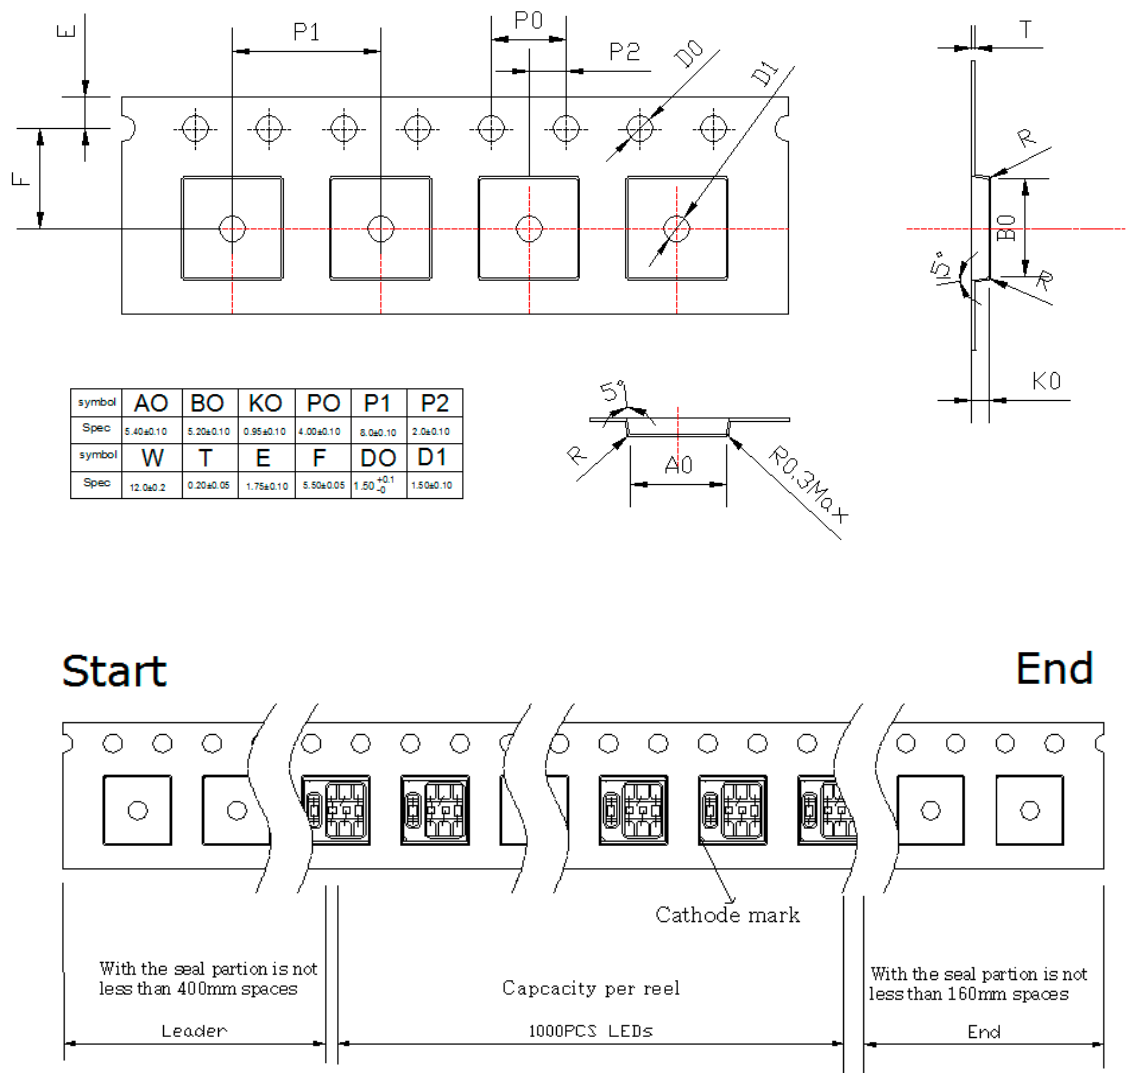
Pocket Tape dimensions for LUXEON MultiColor Module 2.5W.
